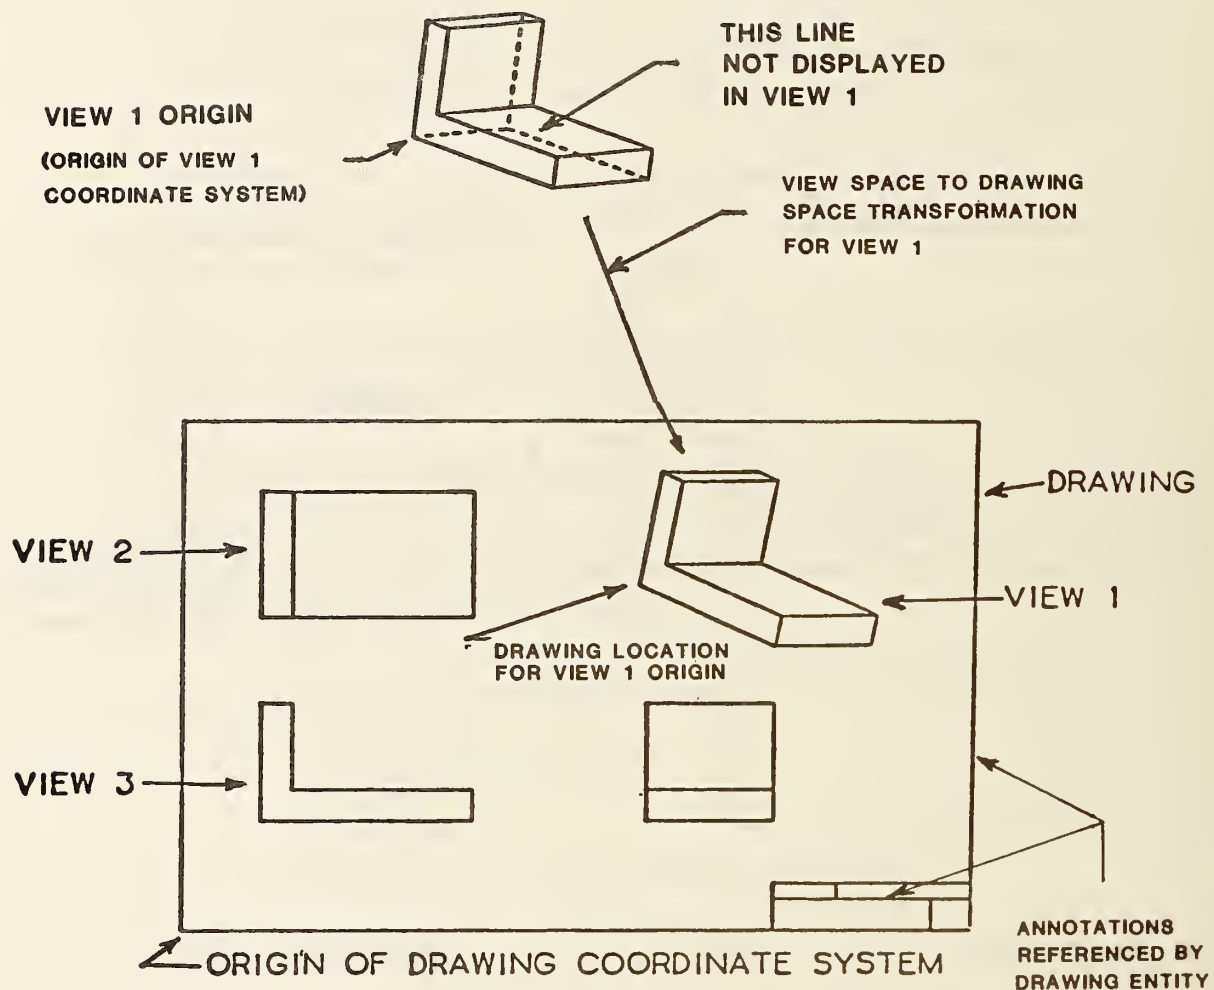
DRAWING ENTITY EXAMPLE 2
